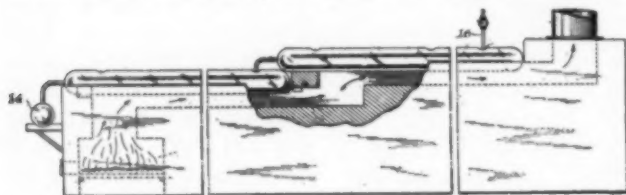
SIDE VIEW OF HART EVAPORATOR
